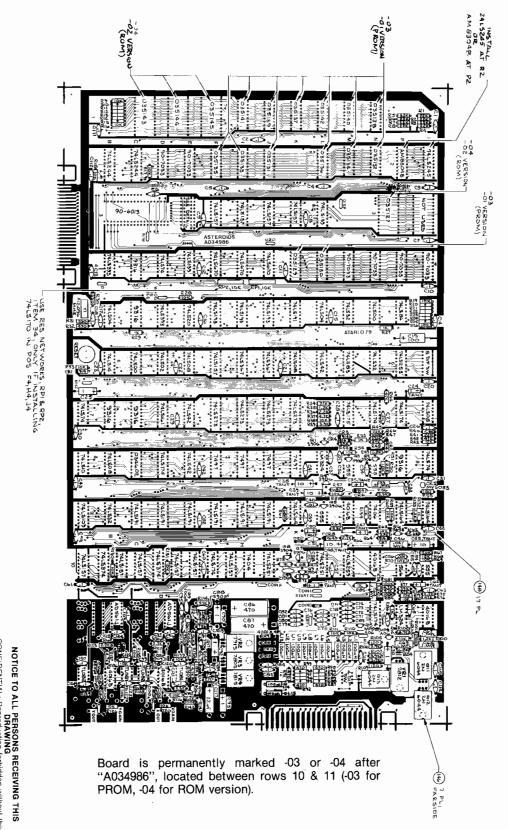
Asteroids Game PCB Assembly A034986-03 and -04 G
